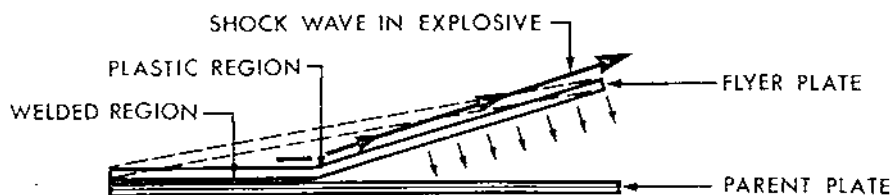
Geometry of Flyer Plate Movement During Weld.
